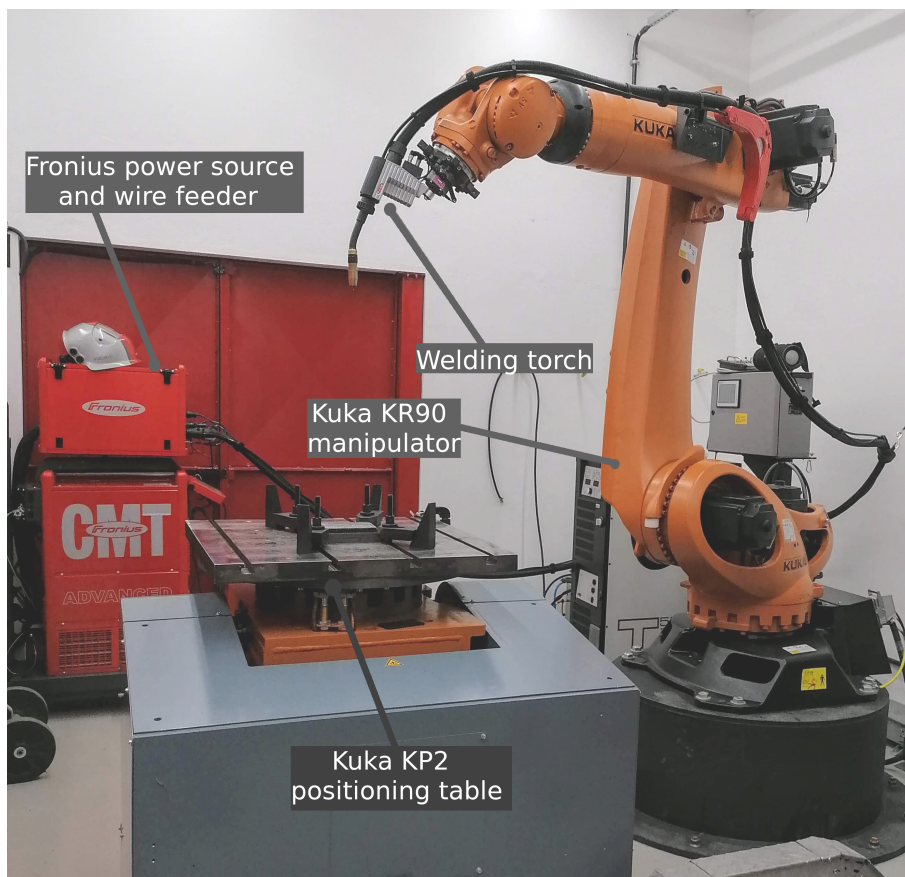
WAAM system with a Kuka KR90 robot arm, welding torch, Kuka KP2 positioning table, Fronius power source, and wire feeder.
